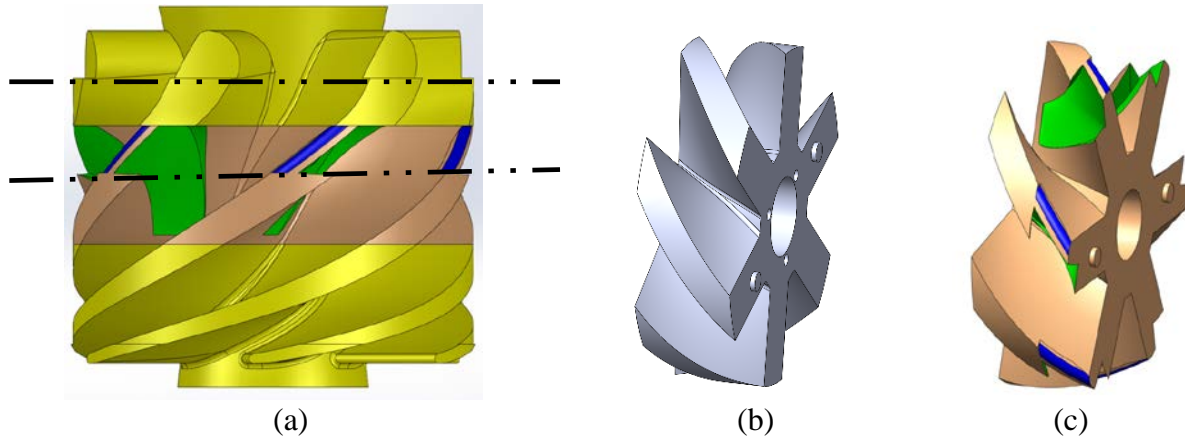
(a) Full RVC center-body assembly with (b) original LLCB middle piece and (c) modified LLCB piece with RVC cut-out (green) and chamfered edge (blue)
